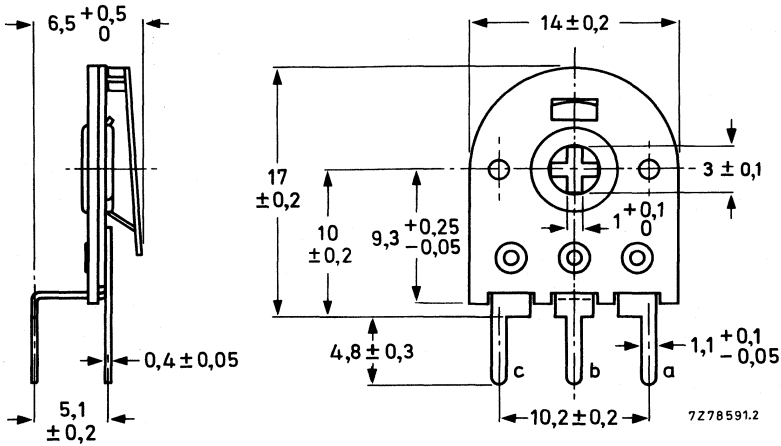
Potentiometer for vertical mounting, with straight printed-wiring pins, 2322 409 002..
